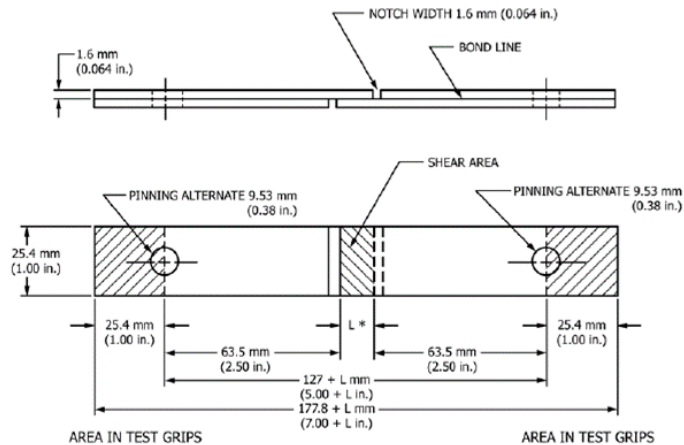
ASTM D3165 Adhesively Bonded Single Lap Shear Specimen for Laminated Assemblies.
